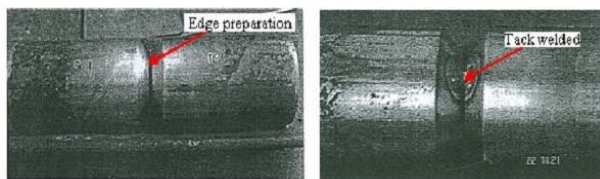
Specimen after edge preparation. Fig. 3. Specimen after tack welding.
